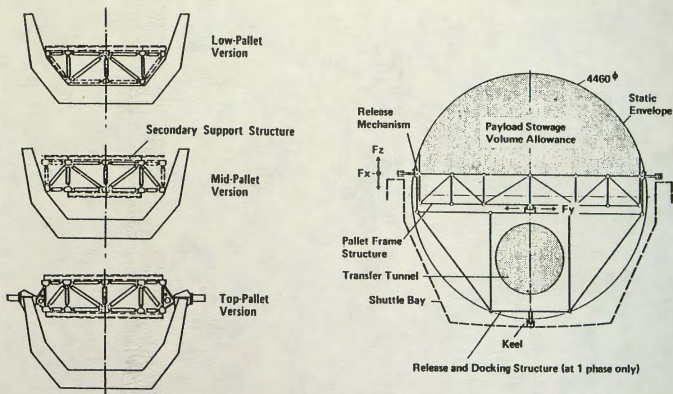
Pallet Support Structures and Supplementary New Bridge Structures
